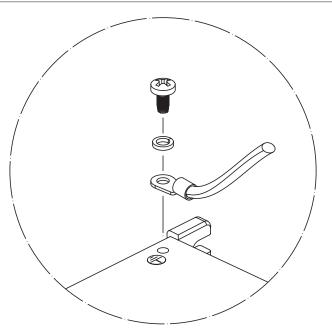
Detail of the installation of the external equipotential protective earthing and bonding connection
